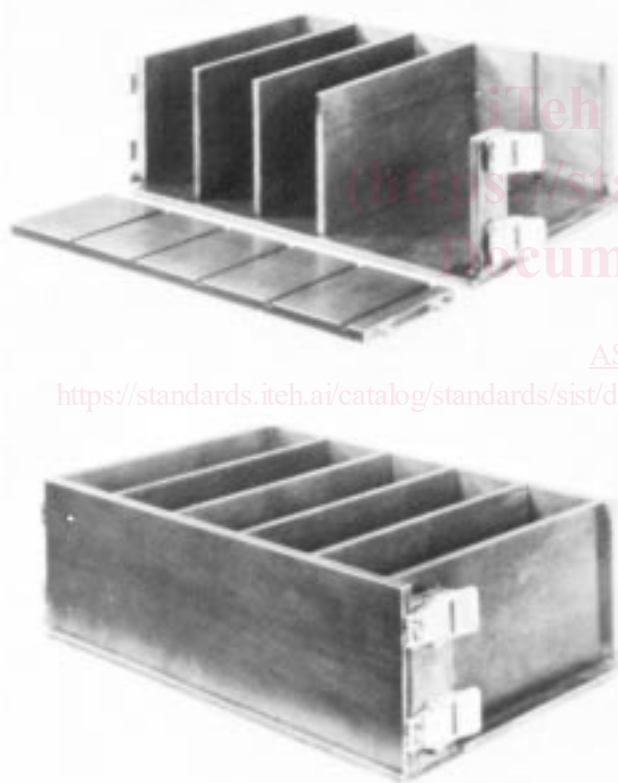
Five-Brick Gang Mold for Castable Refractories
